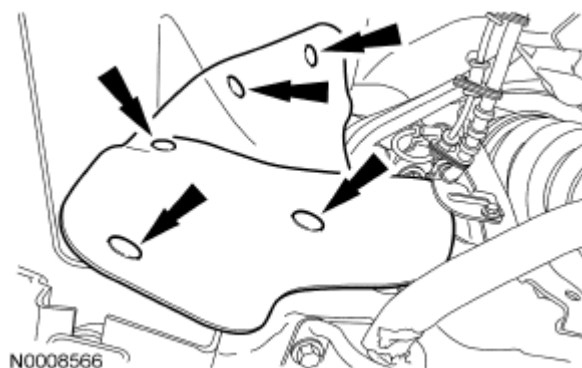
Locating RH Inner Fender Splash Shield Pushpins
